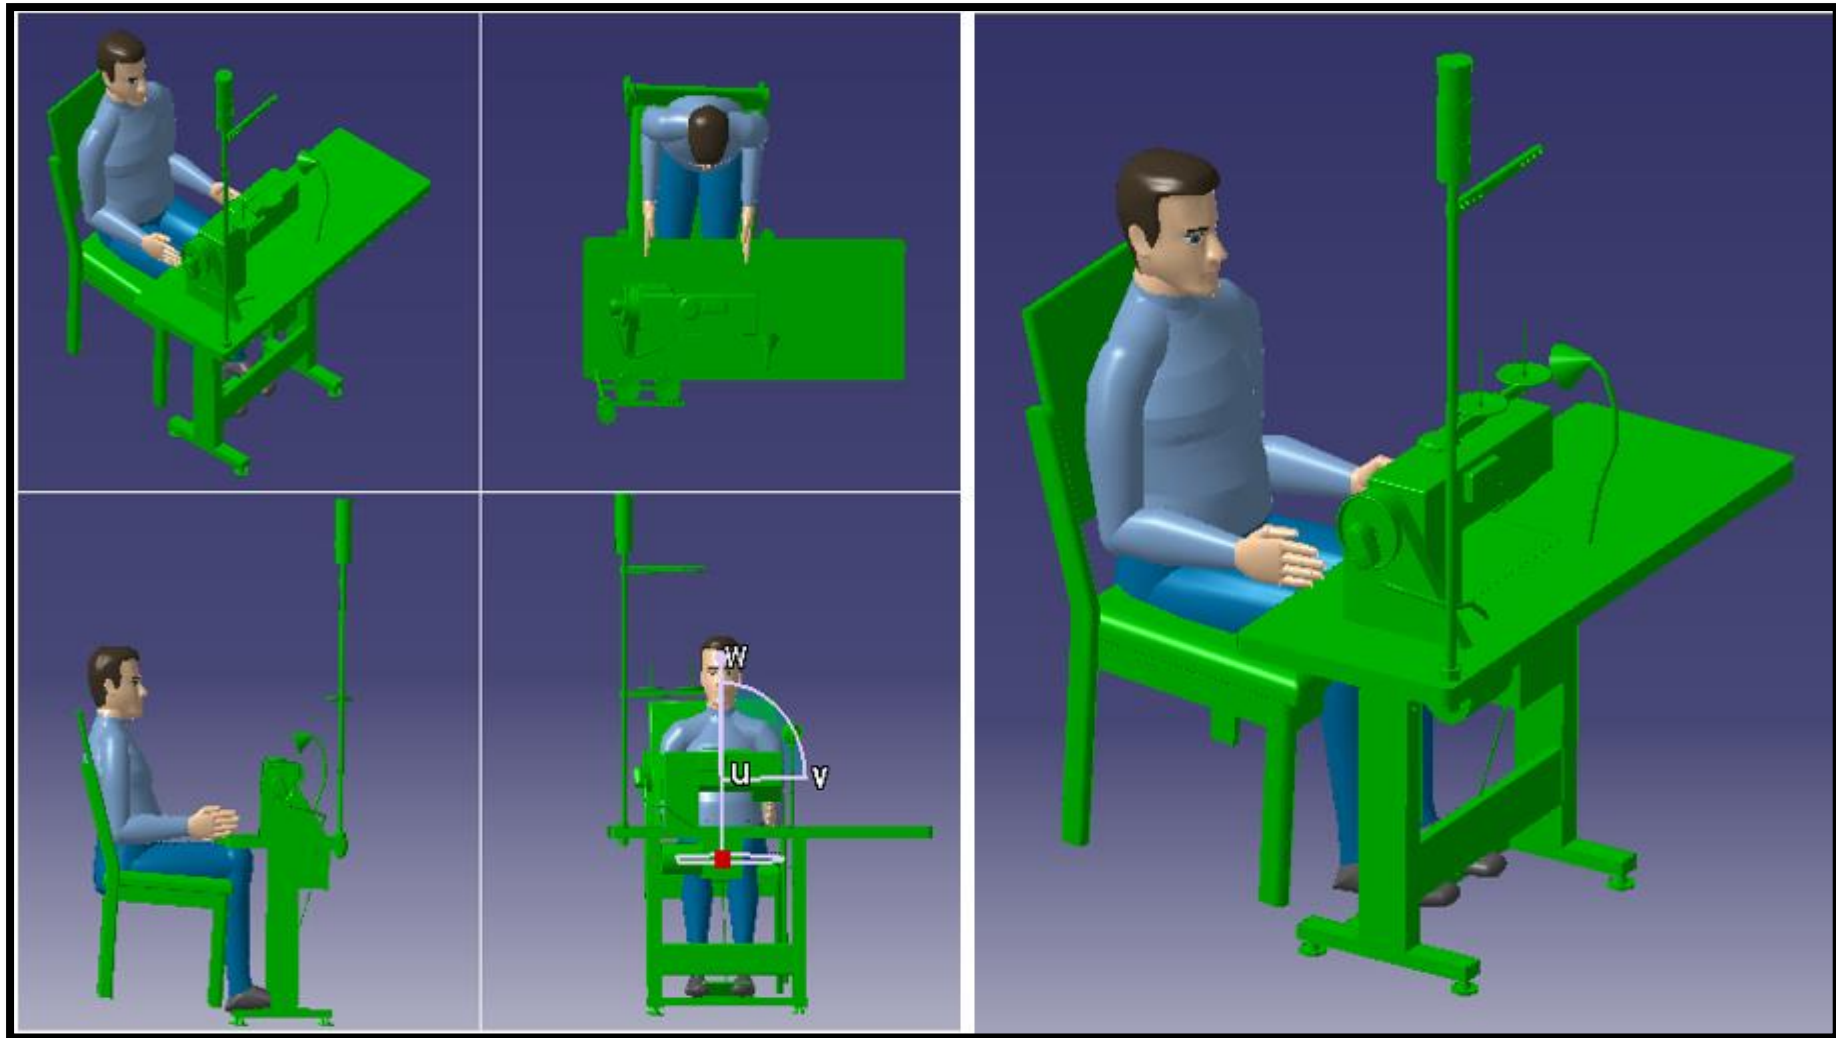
Complete assembly of the models (selected sewing chair + adjustable sewing machine table + manikin) done by 3D CATIA
